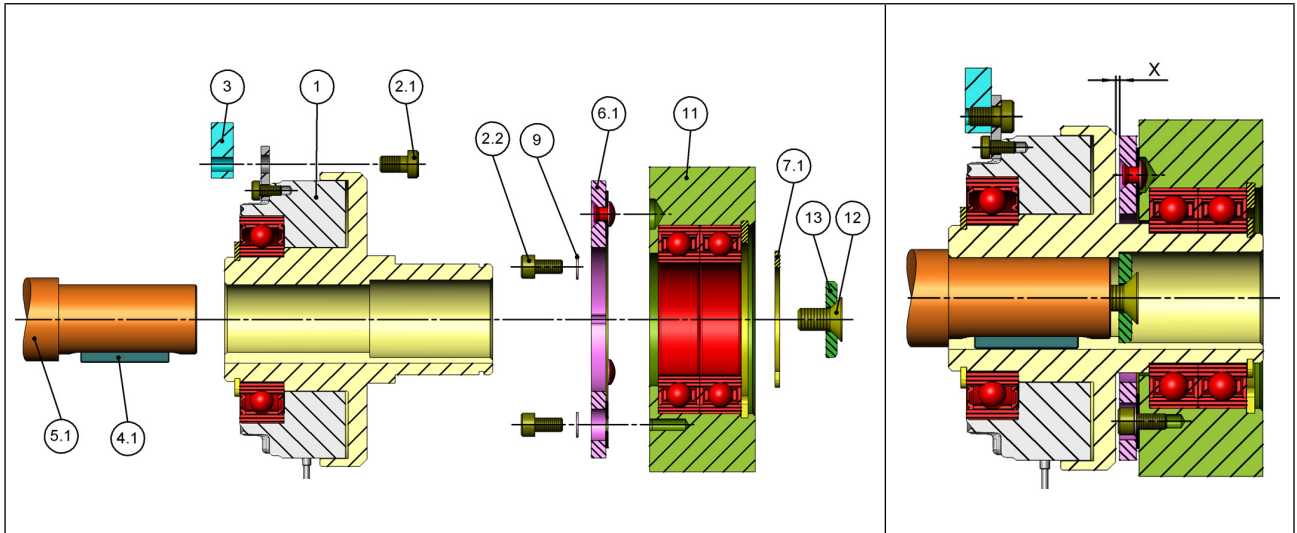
Shaft-mounted coupling with bearing retainer for the output (e.g. 06...12-03-810-xxxx)
